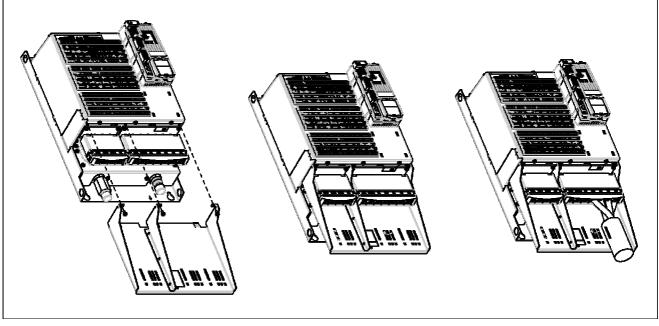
Mounting a Screening Kit on a Liquid Cooled Power Module PM340, frame sizes FSD and FSE
